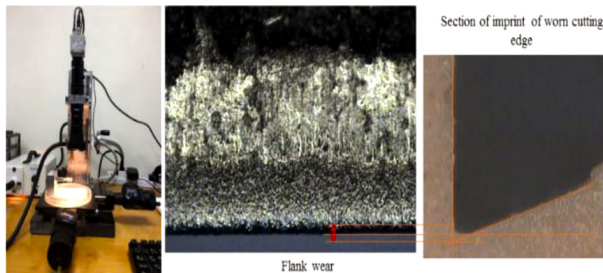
Setup of the optical microscope with the tool holding fixture and the flank wear at the tool edge.
